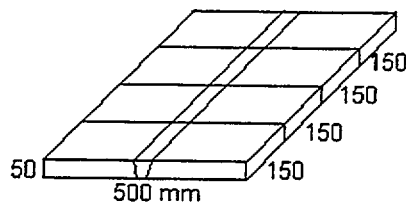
Sectioning of 316L plate to make four fatigue specimens.
